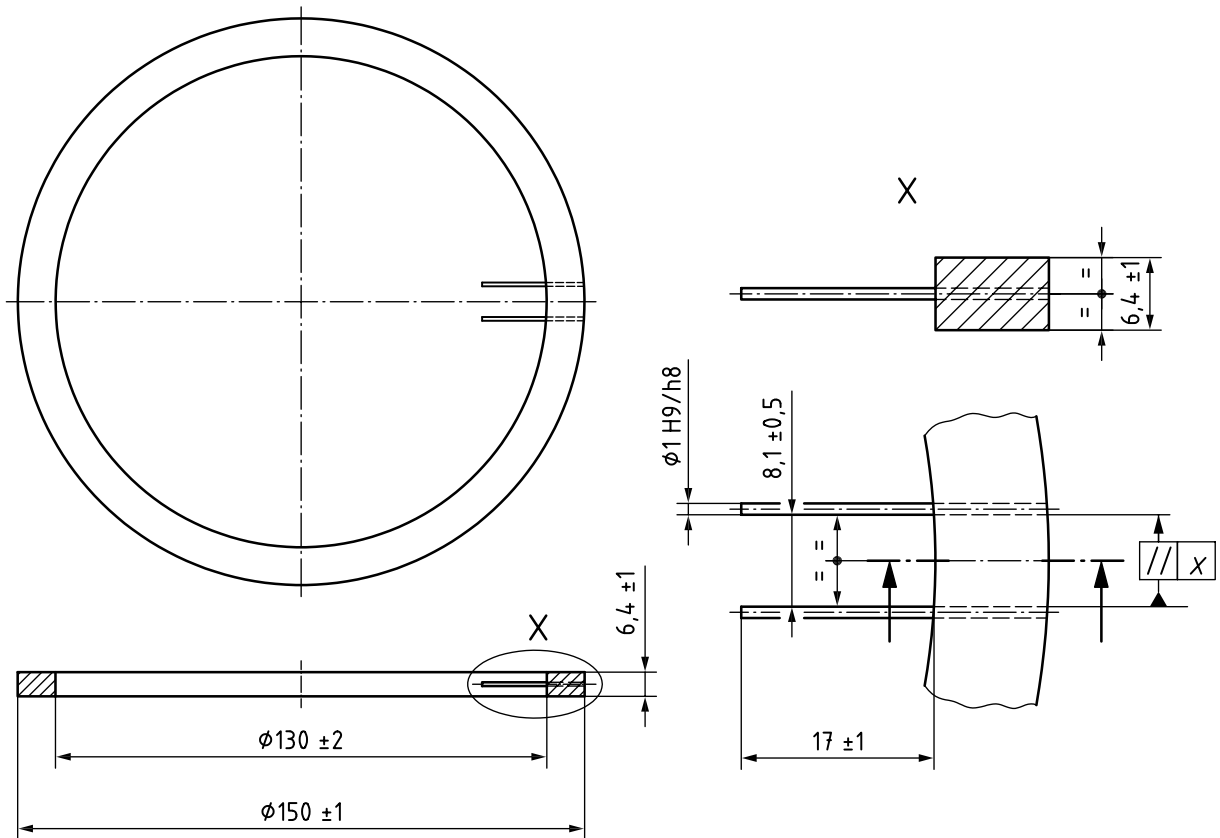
Views of the metal rim, with expanded view of pin placement for cigarettes of 8 mm diameter
